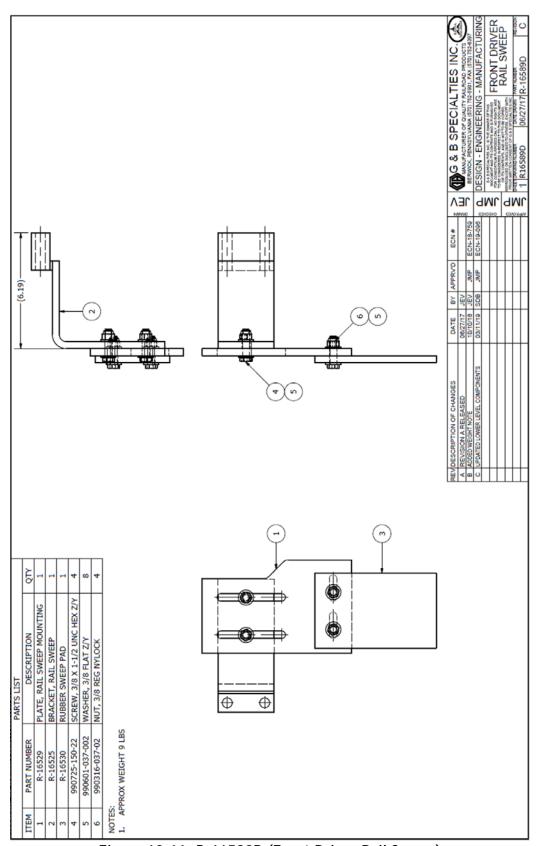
R-16589D (Front Driver Rail Sweep)
